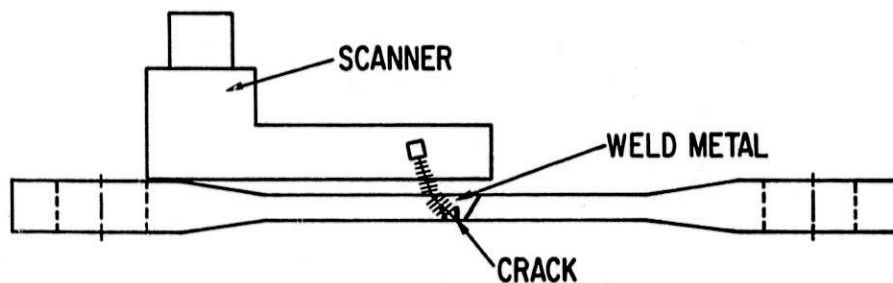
Arrangement of Scanner and Cracked Welded SS Tensile Specimen (supplied by HEDL) for Detection of Weld-metal Crack. Neg. No. MSD 65559.
